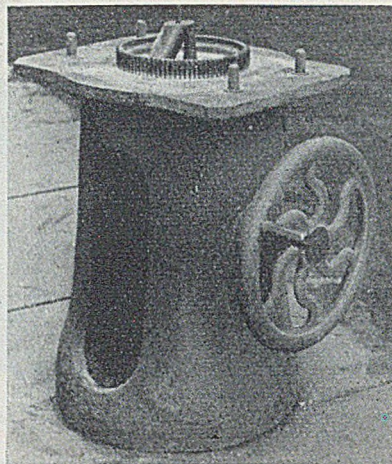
Old Stripping-plate Machine as used for Producing Gear-wheel Moulds.
